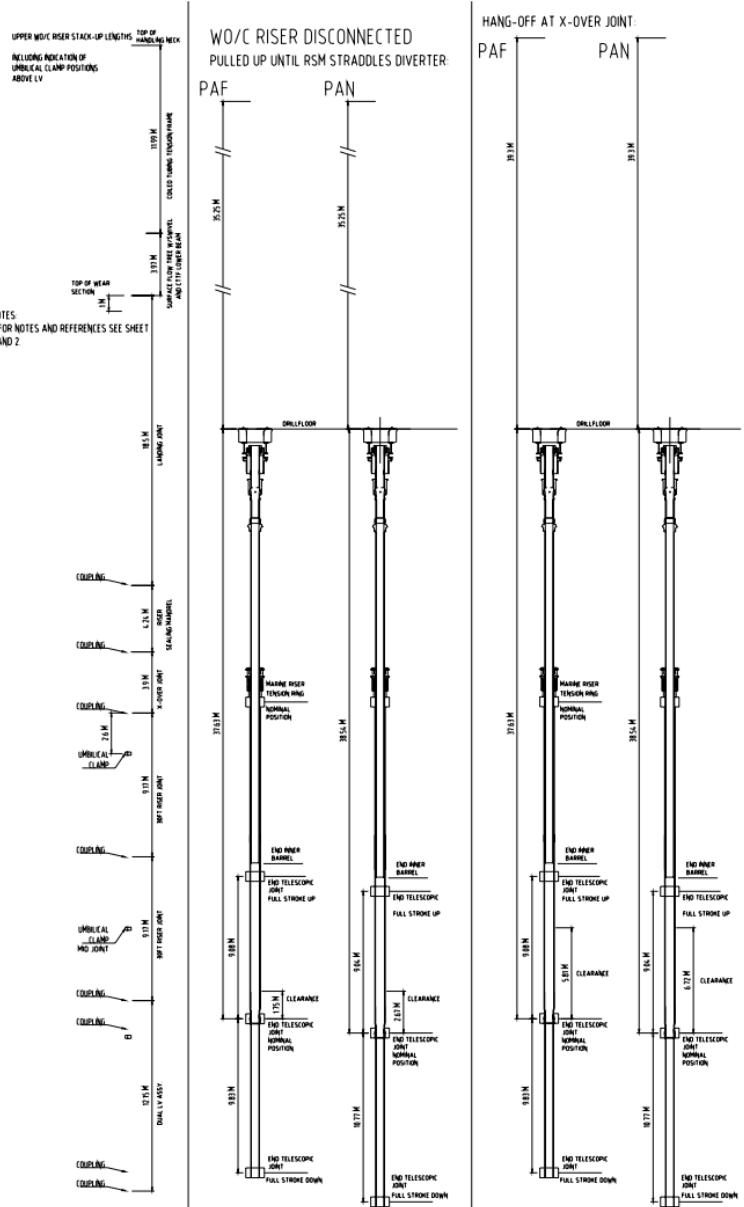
NE0017-00 / AO32-2-100-010-LN-10-DK-092 (Sheet 1/3)
